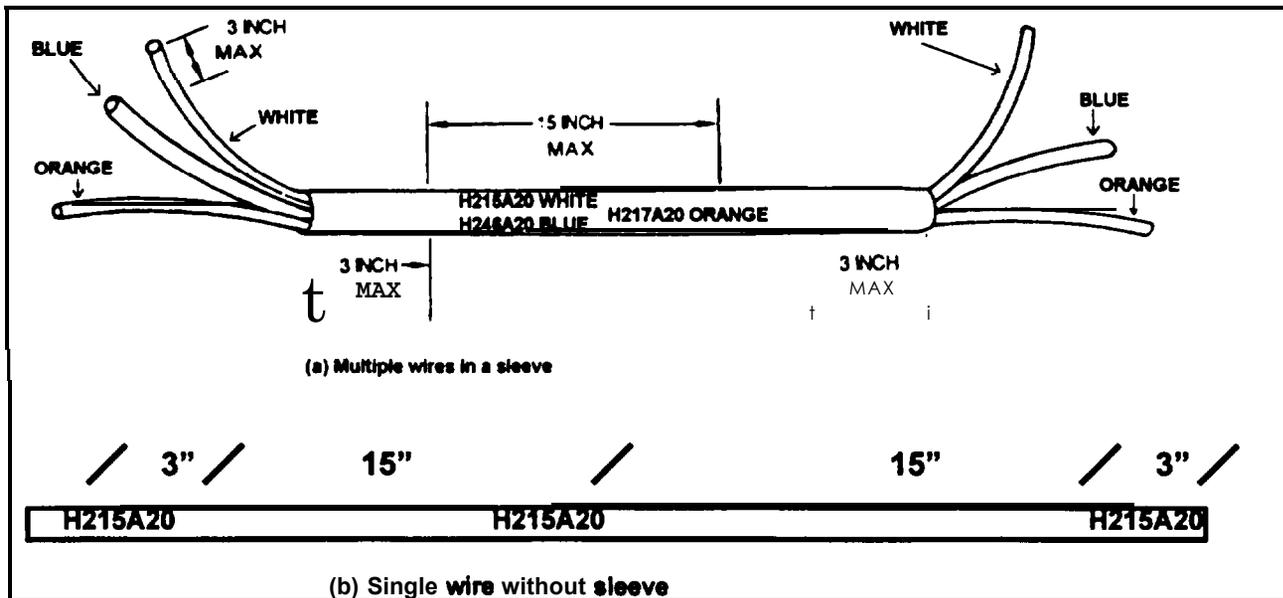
Spacing of printed identification marks (direct marking).
